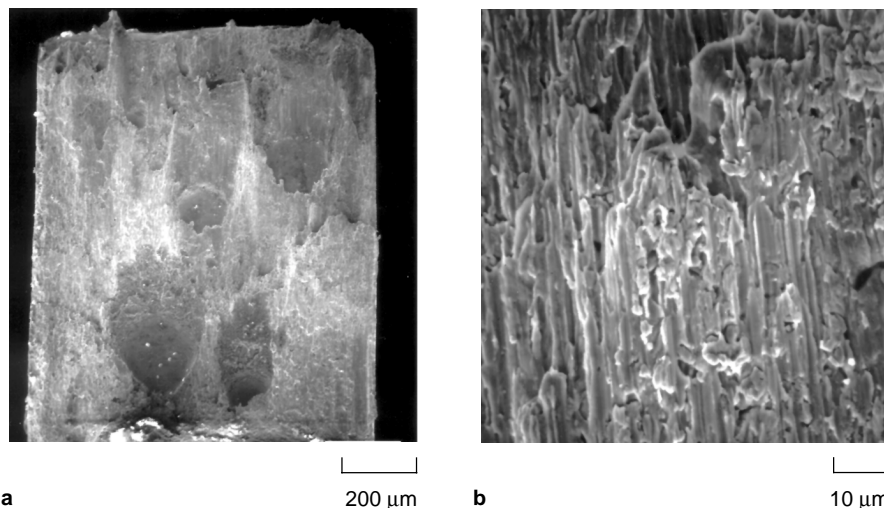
Representative fracture surface of the crept solder joint: (a) A Cu_6Sn_5 particle-reinforced Sn-3.5Ag solder joint with 10.5% porosity, and (b) smeared surface due to fracture in pure shear.
